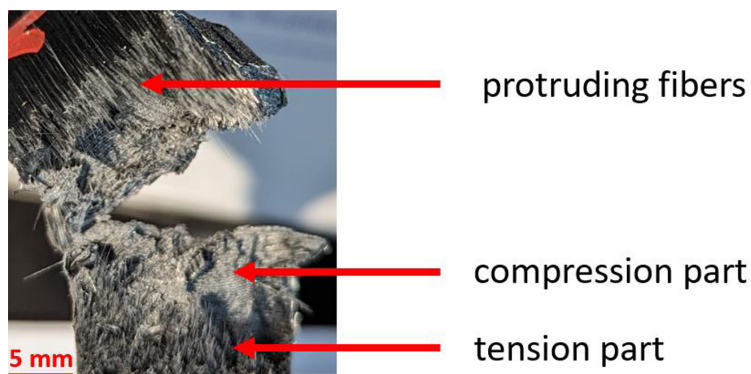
View of the fracture surface of the specimen (PP + GF) statically bent
